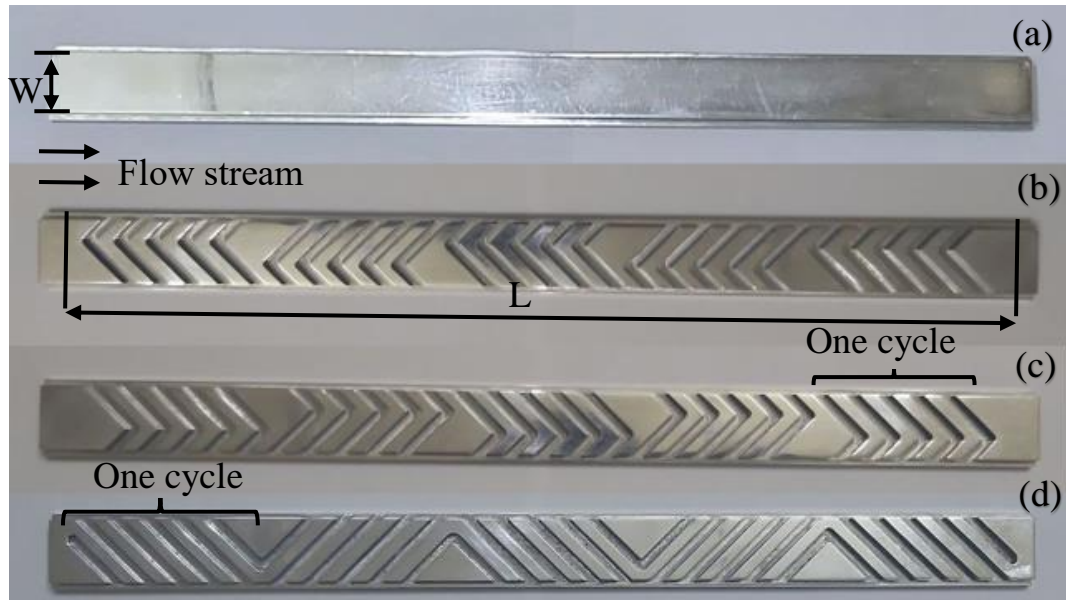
Photographs showing the fabricated pieces of grooved channels with different patterns: (a) SCH, (b) F-VGCH, (c) B-VGCH, and (d) 45-IGCH
